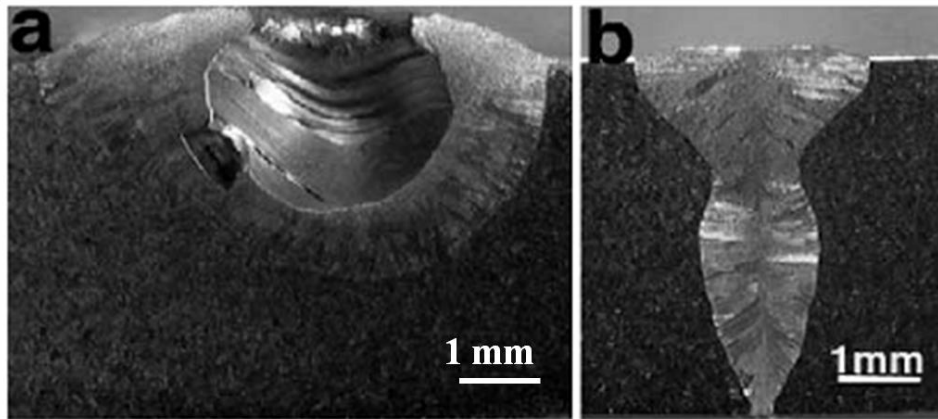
Weld bead cross section of high-Nitrogen steel (0.32 pct. N), (a) GTA welding in 40% Ar and 60% N₂ atmosphere and (b) CO₂ laser welding in pure N₂ atmosphere [108].
